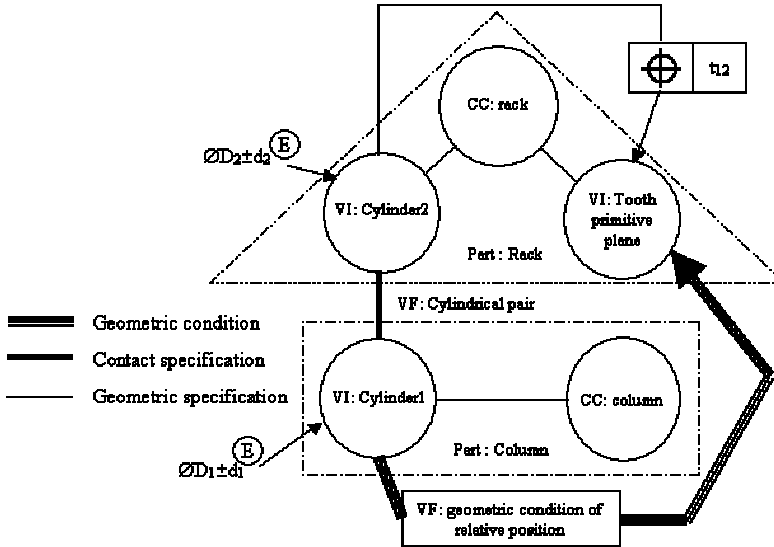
A 3D-dimensional chain in the product model for the assembly of the column and the rack according to a geometric tolerancing point of view.
